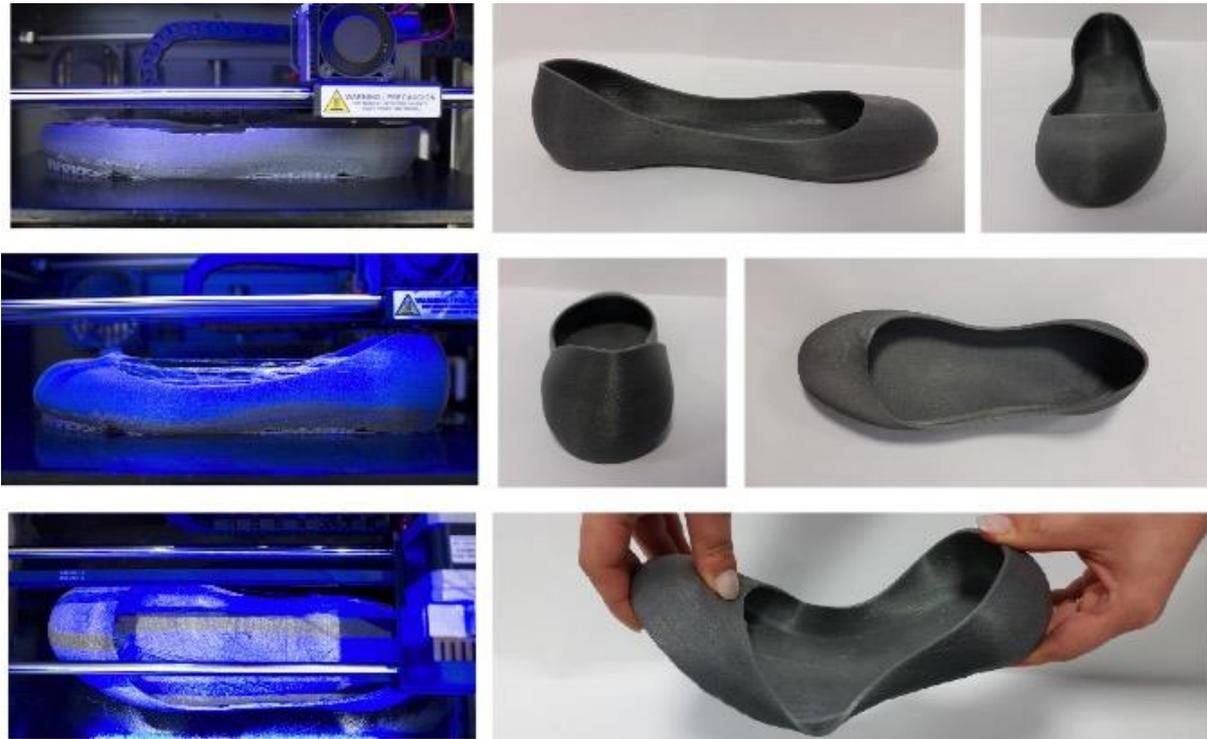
On measure flat shoes in TPU. Additive manufacturing using FDM technology. Authors: Giorgio M, Sciancalepore, M. Degree Thesis in Industrial Design. Advisor, Di Roma, A.
